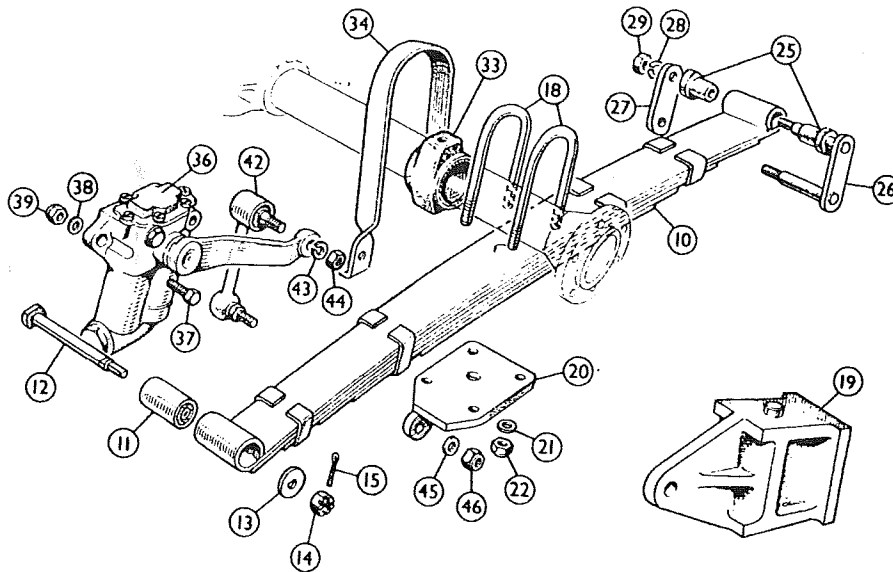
Exploded View Of Left Side Of TR4 Rear Suspension
